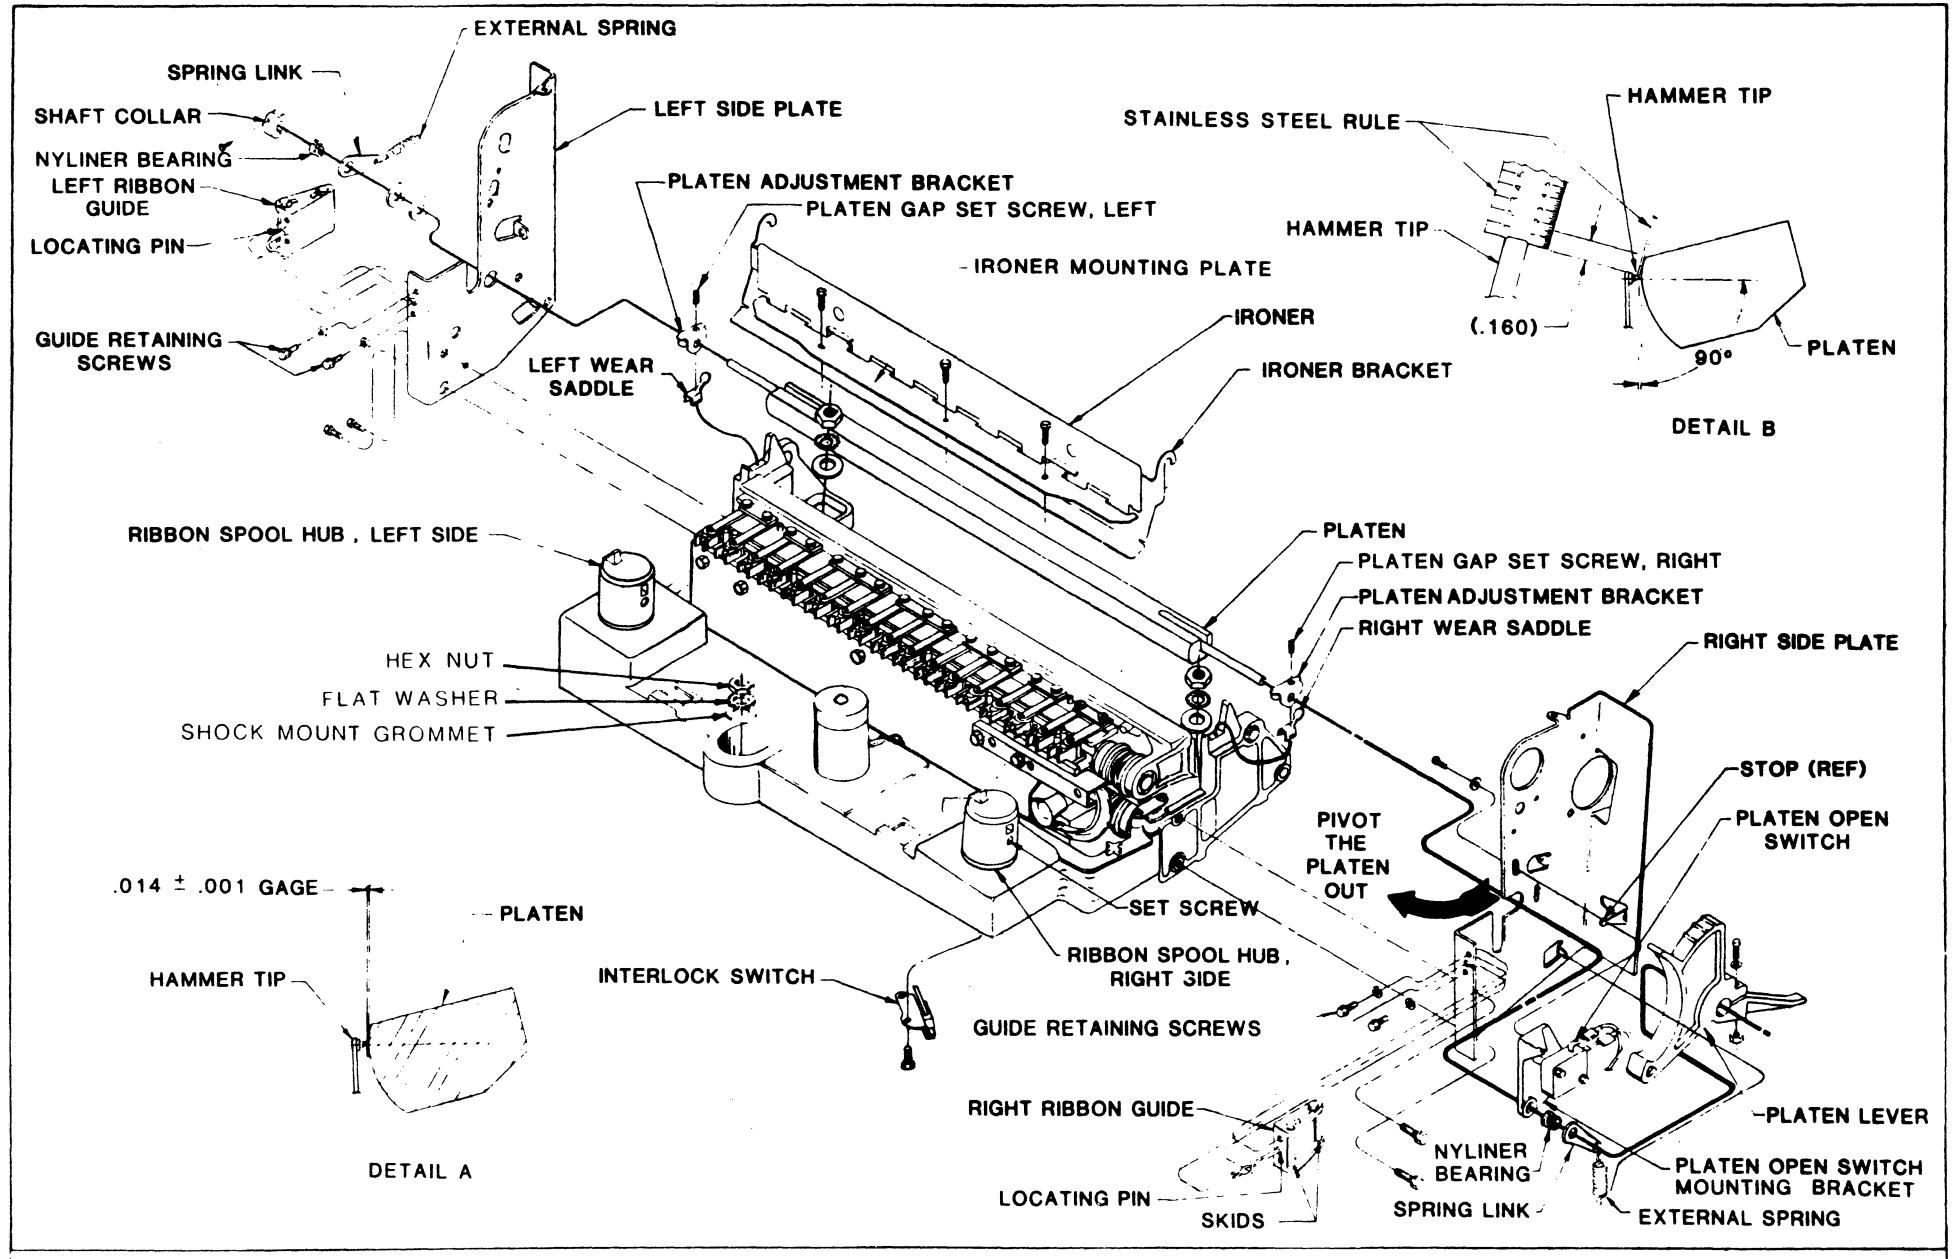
The Platen Assembly, Ribbon Guides and Spool Hubs
